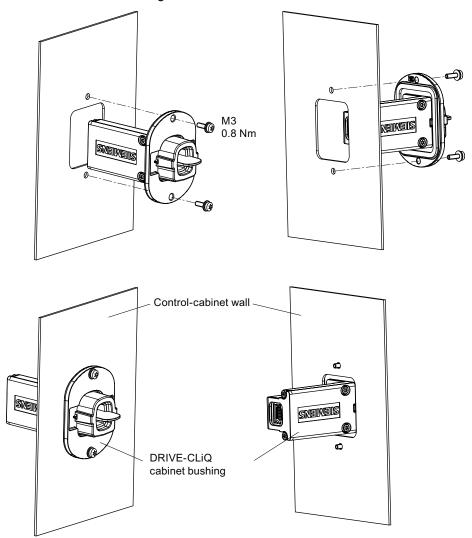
Installing the DRIVE-CLiQ cabinet bushing
